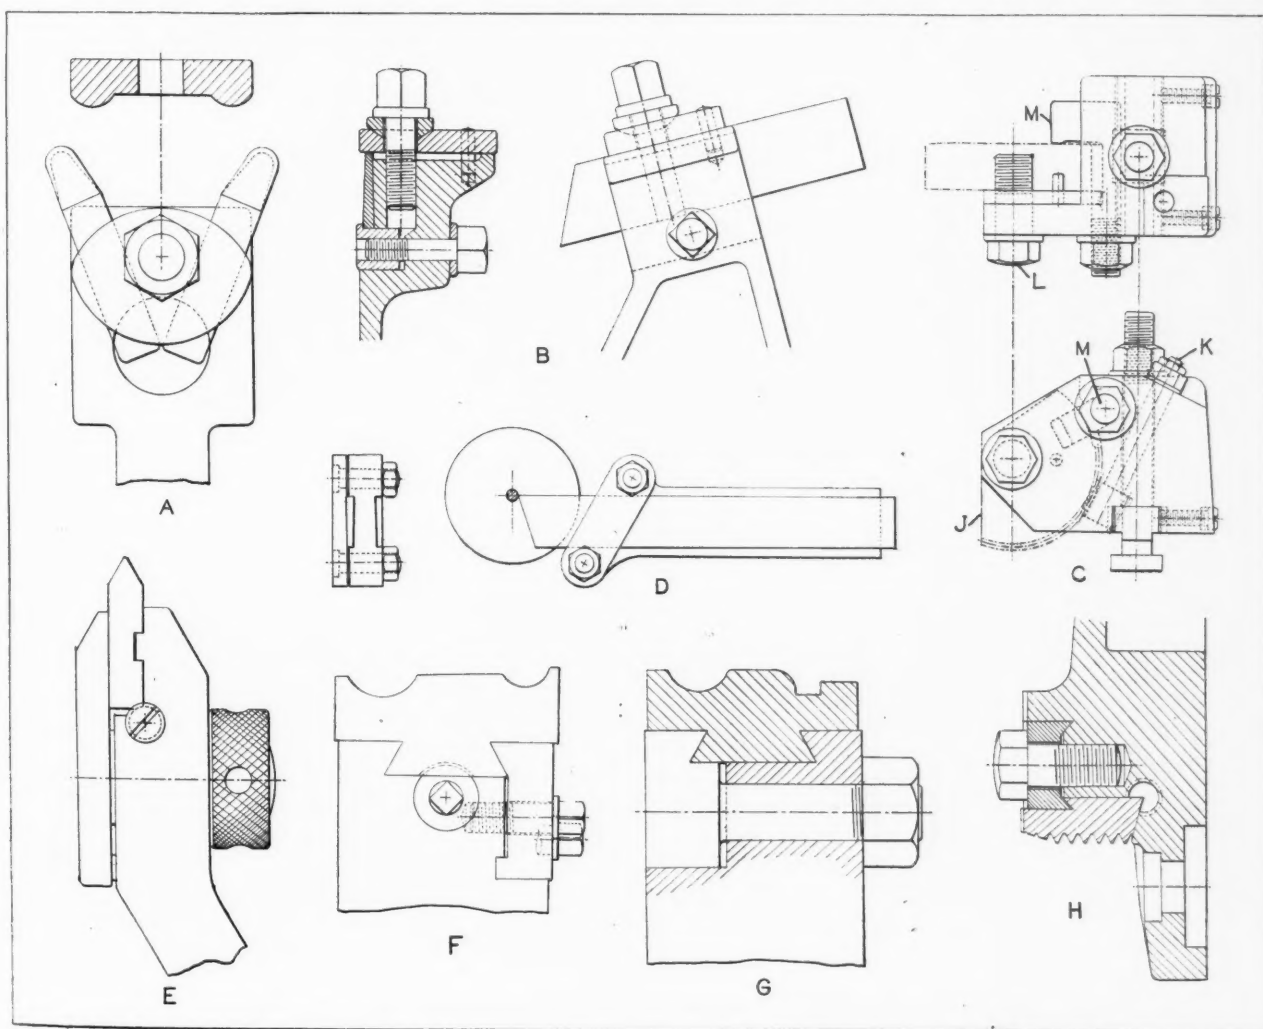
Special-purpose Tool-holders with Varied Means for Clamping
